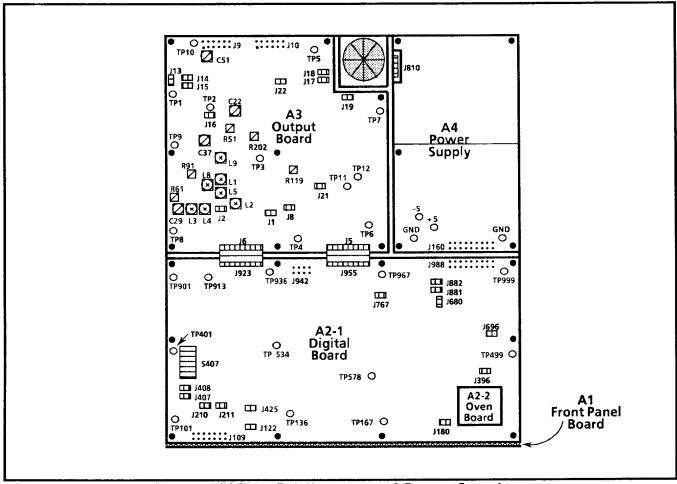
TSG-170D Adjustment and Jumper Locations.
